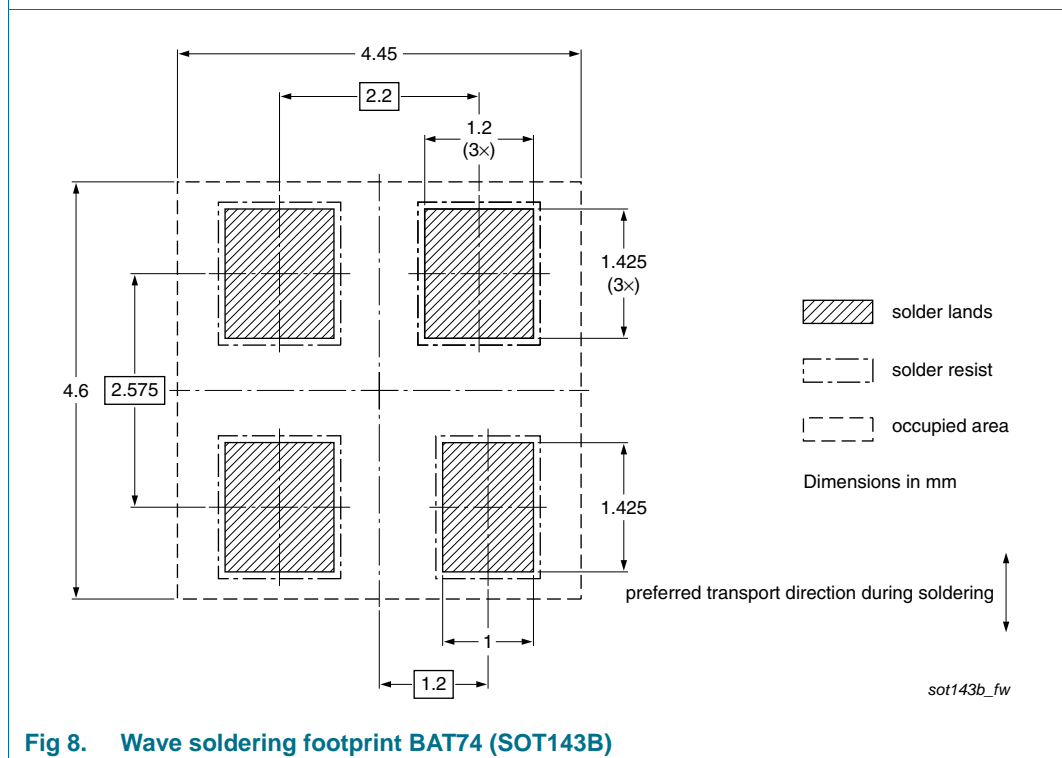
Wave soldering footprint BAT74 (SOT143B)
